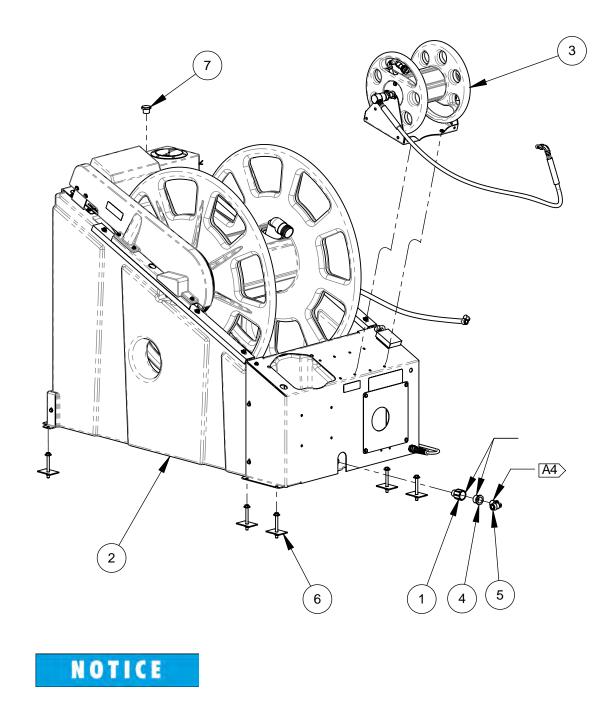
125 Gallon HydraCradle Tank Assembly 000-163-082 Rev. D
